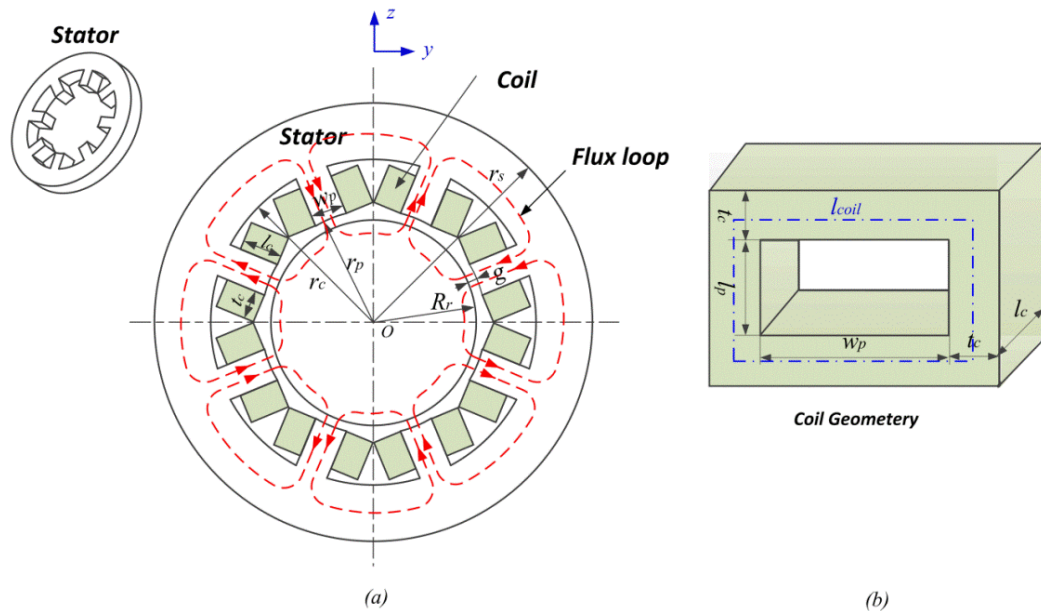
8-pole magnetic bearing stator (a) and exaggerated coil geometry (b)
